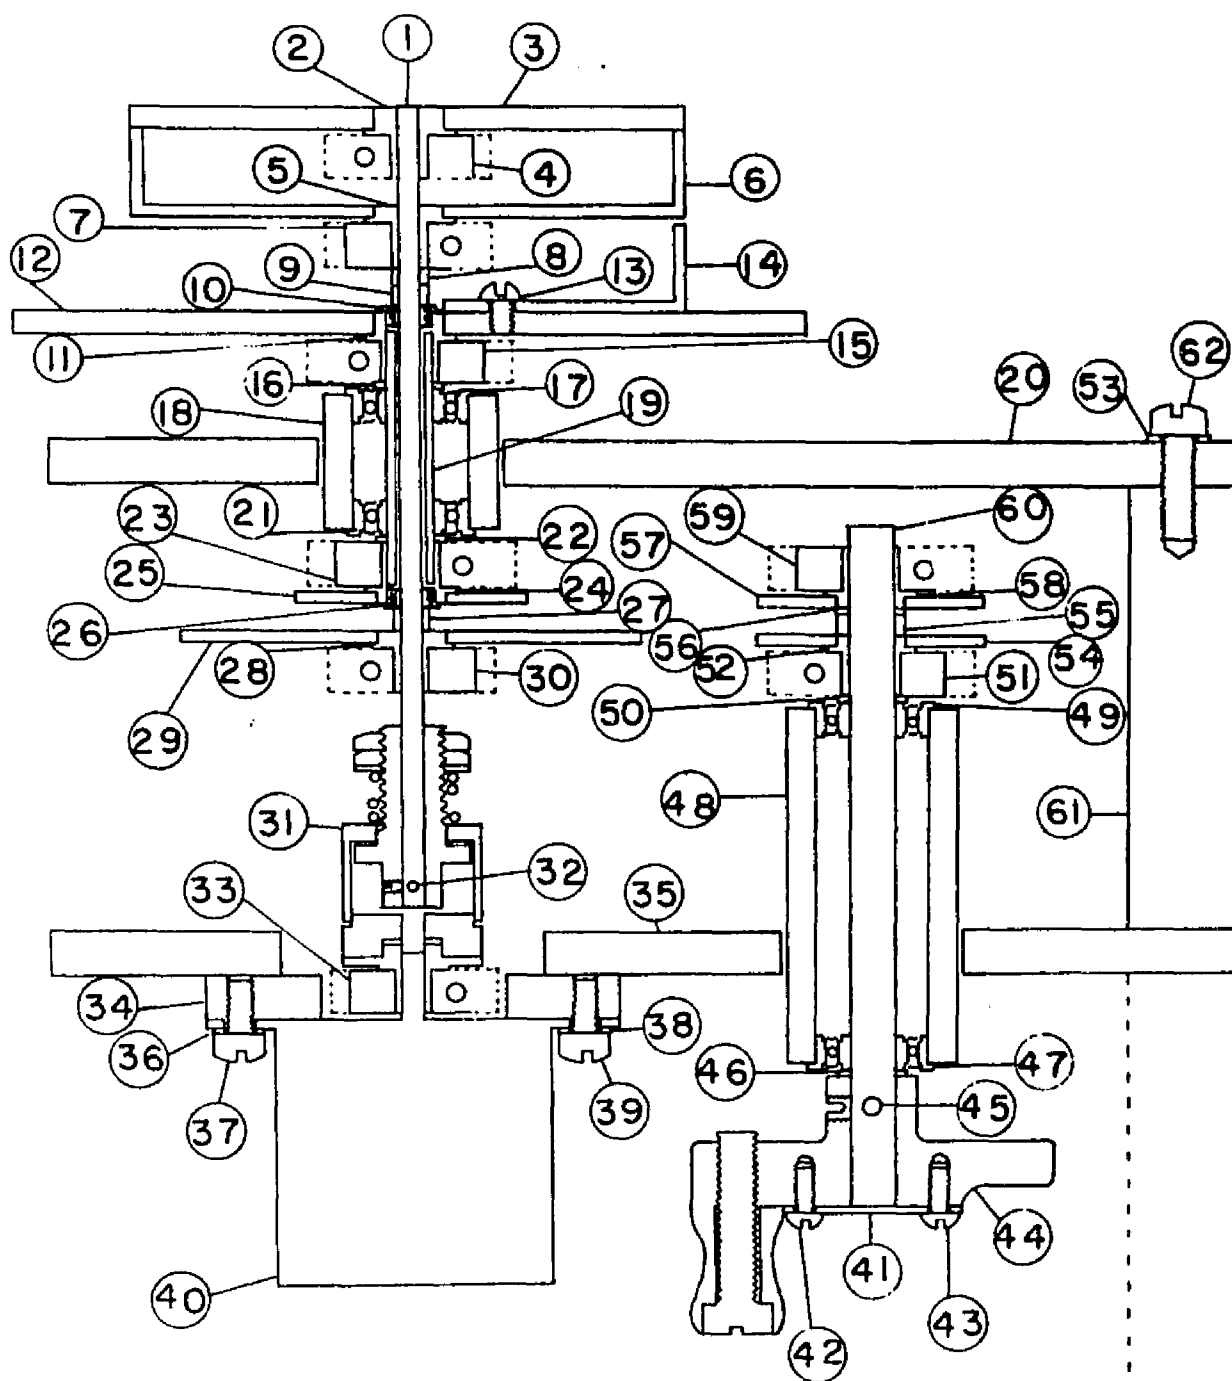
Longitudinal section of theta, two-theta goniometer through drive and coupler shafts (adjustable centers). The location of this section is shown as AA' in Figure 4.
